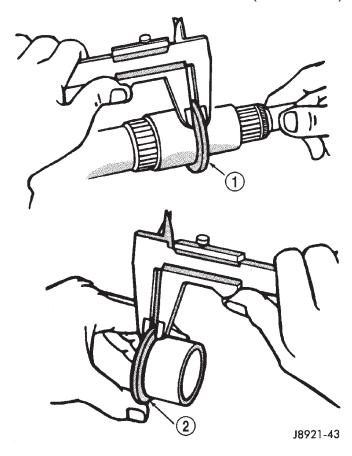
Check Shaft And Bearing Race Flange Thickness
